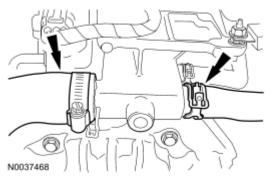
Locating Upper Radiator And Heater Hoses Courtesy of FORD MOTOR CO.
